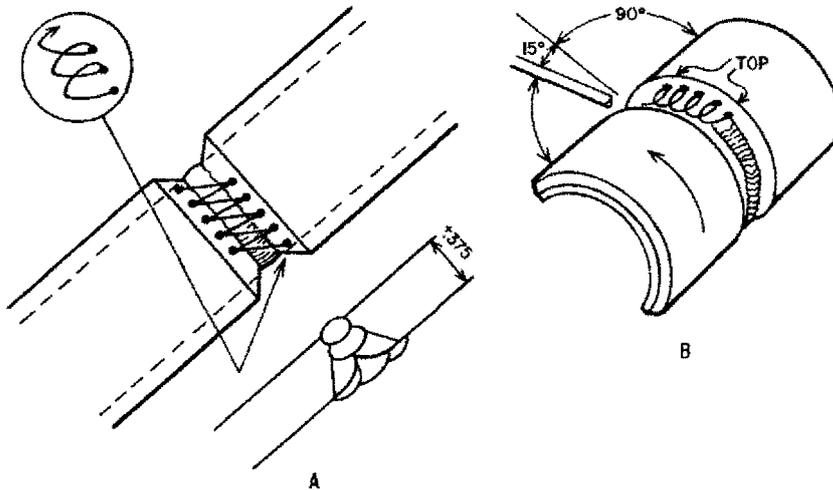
Weave patterns used for uphill welding of pipe joints in angular (6G) position.
